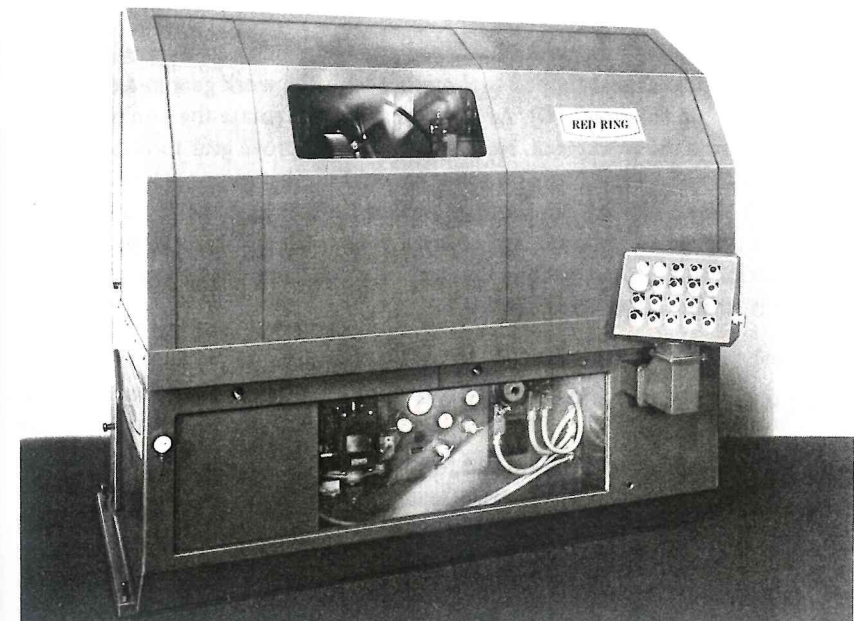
Honing machine. (Courtesy of National Broach and Machine Division of Lear Siegler, Detroit.)
